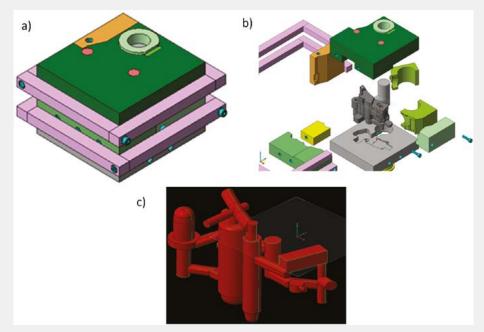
a) CAD model of the mould of gear pump unit, b) CAD model of various parts of the mould and c) CAD model of the core
